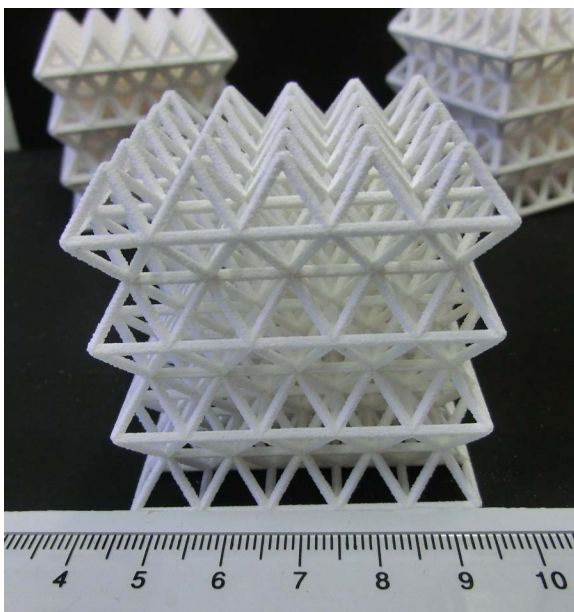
3D printed prototype with 1.5 mm thickness in detail
